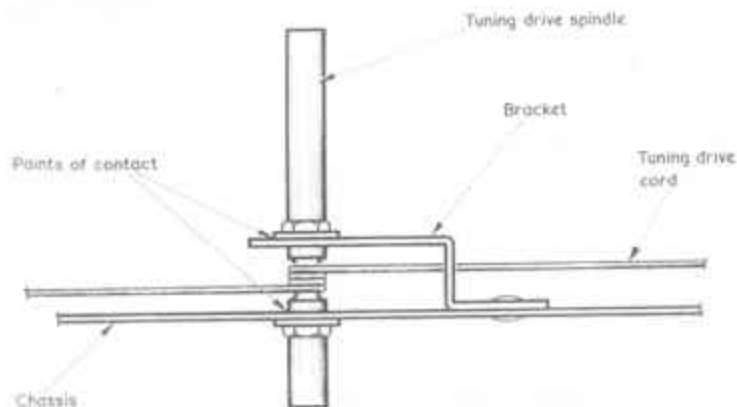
In this typical tuning drive spindle mounting, the spindle simply revolves in holes in a mild steel chassis and support bracket. In consequence, the electrical contact between the spindle and the chassis, as the former is rotated, is of an intermittent character.
